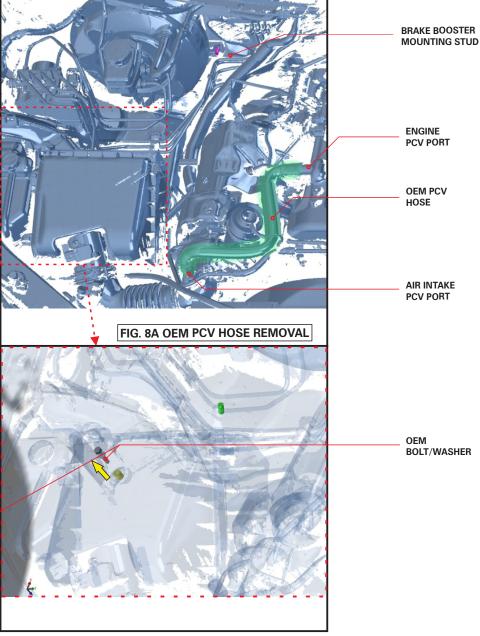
AIRBOX MOUNTING OEM BOLT/WASHER REMOVAL
